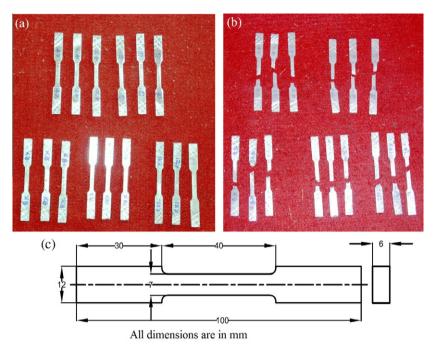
Tensile specimens of AA6061-B₄C composites: (a) before test, (b) after test, and (c) the dimensions of tensile specimen.
